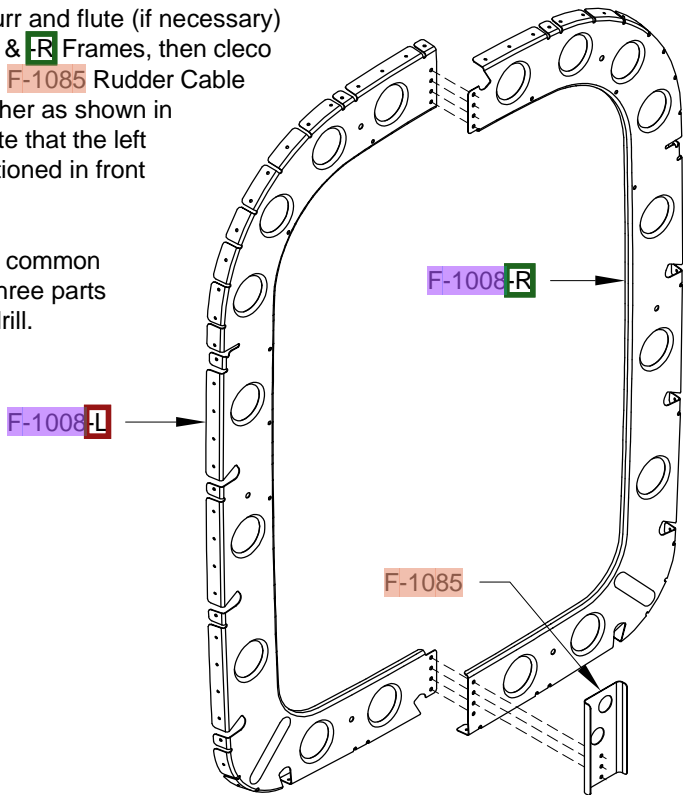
ASSEMBLING THE F-1008 FRAME
